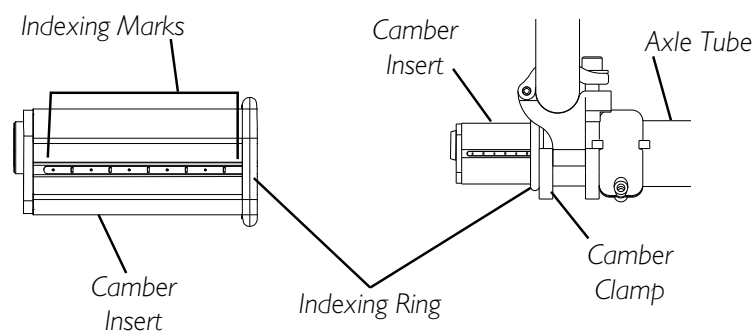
ADJUSTING WHEELBASE WIDTH
